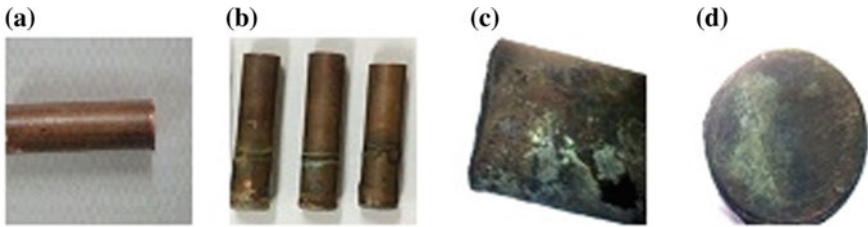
Surface of the PT before machining (a) and after machining (b, c, d)
